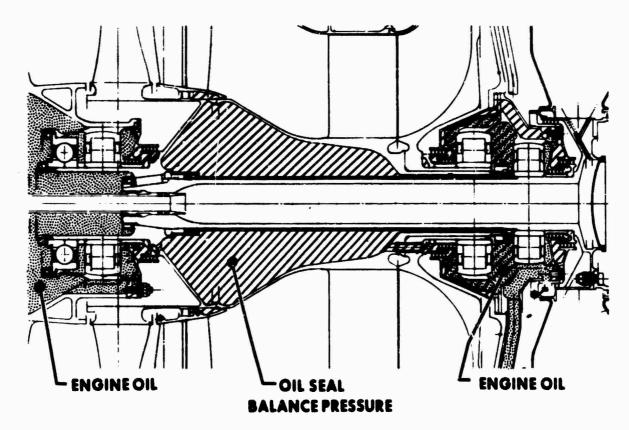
Continental 357-1 Engine Oil Seal Balance Pressure.
